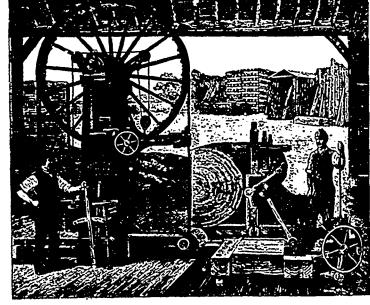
LOG BAND SAWING MACHINE. The grinding of saw teeth with One of the most complete log band mills built in England, closely modelled after American design, is representing good English and American practice.
